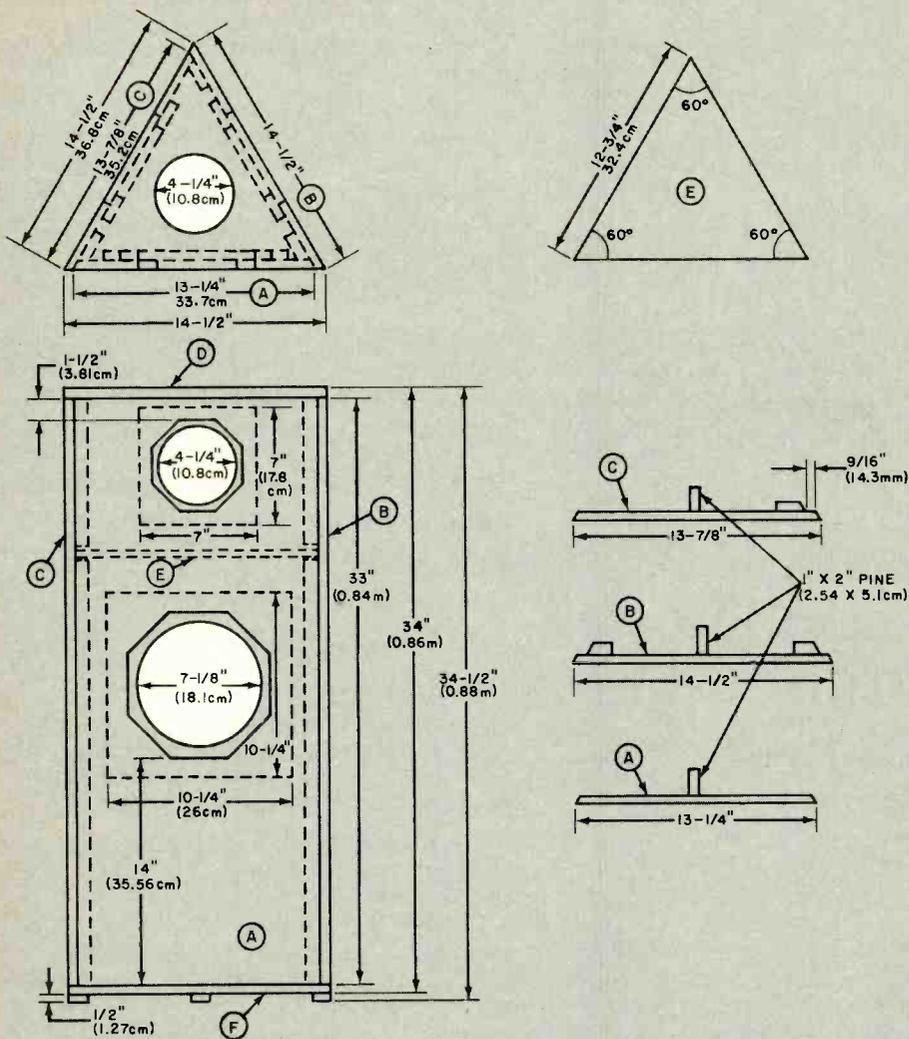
Enclosure shape is triangular. Drawings show dimensions and details.
